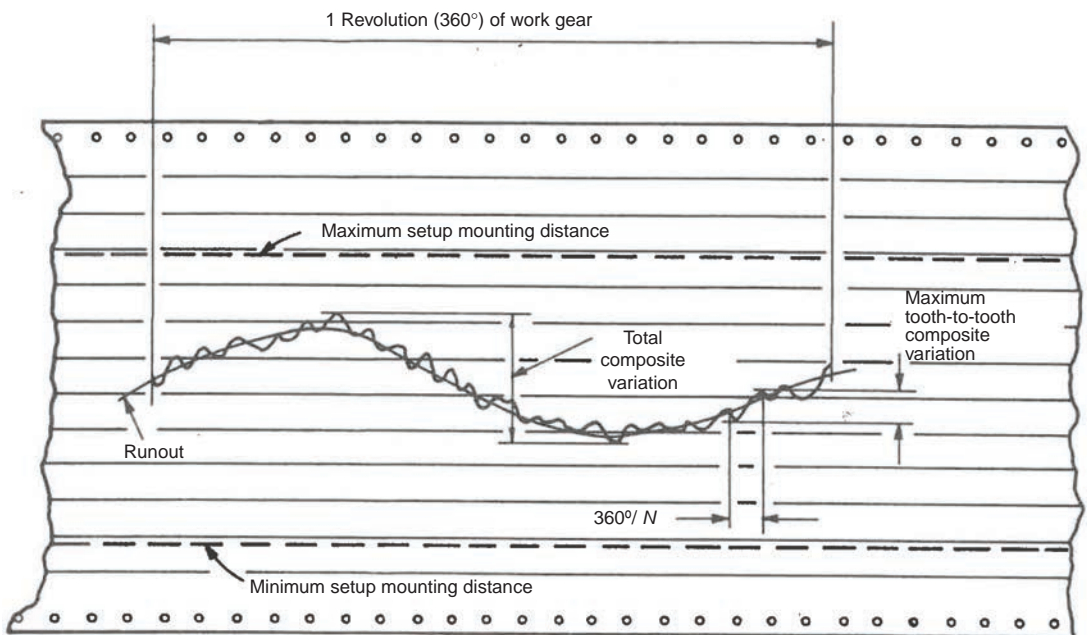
Chart of gear tooth errors of a typical gear when run with a specified gear in a rolling fixture
